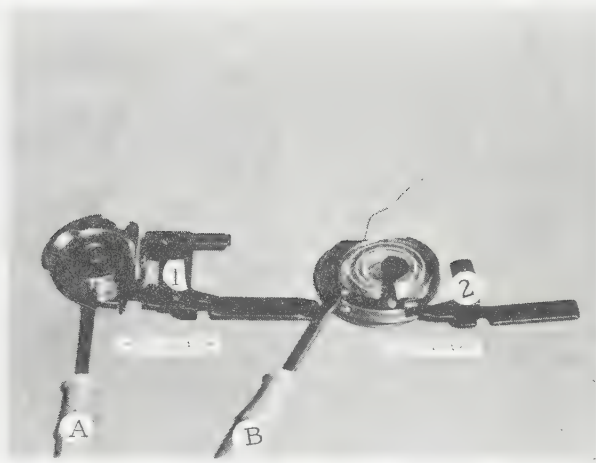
illustrates the difference between series 400 & 500 machine (1) and series 600 (2). Style (1) is similar to countless Singer machines and contains many conventional features. Style (2) features new innovation where bobbin is wound right in the bobbin case.
